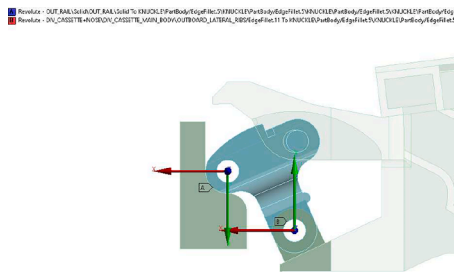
Revolute joints set between knuckle and the surrounding components.
